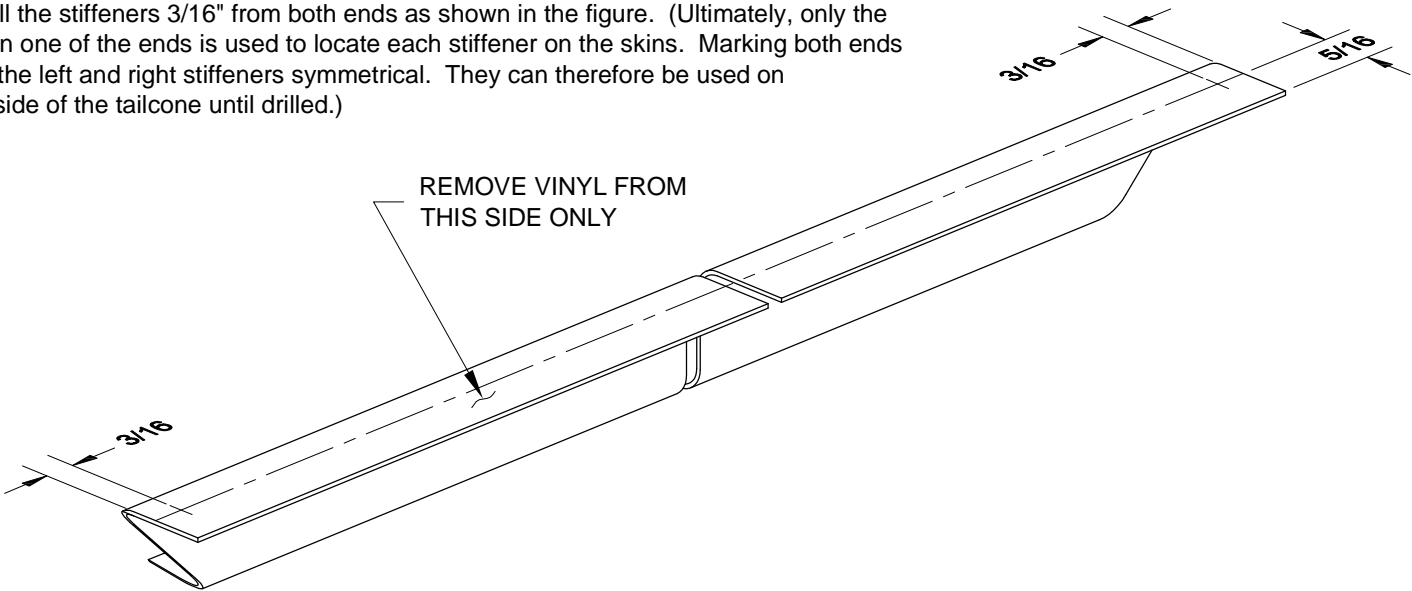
MARKING THE FUSELAGE STIFFENERS
